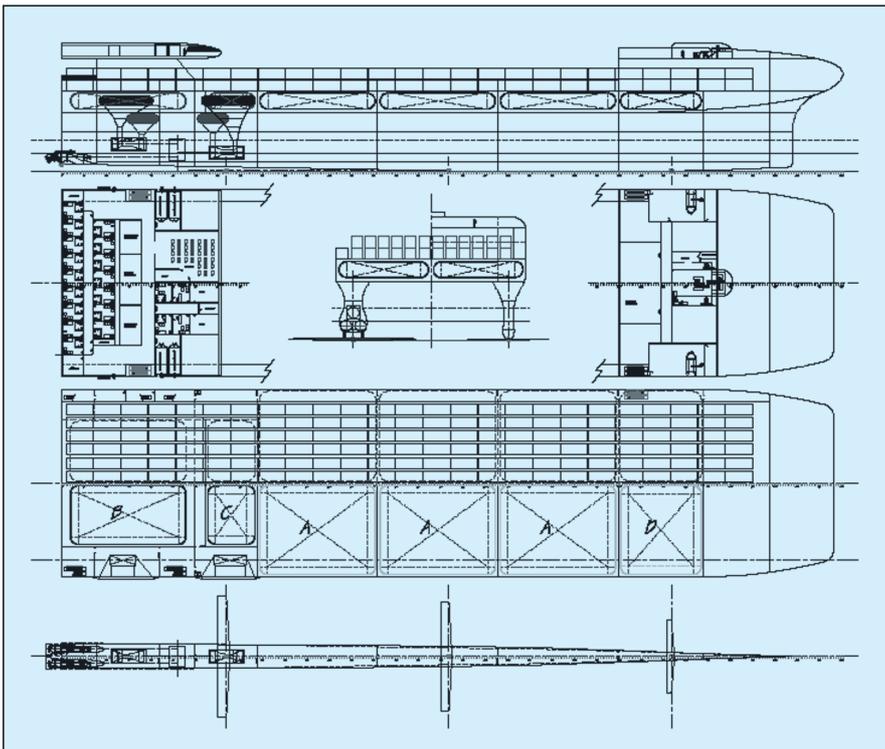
General arrangement of the 600TEU container feeder ship, fuelled by LH₂.
